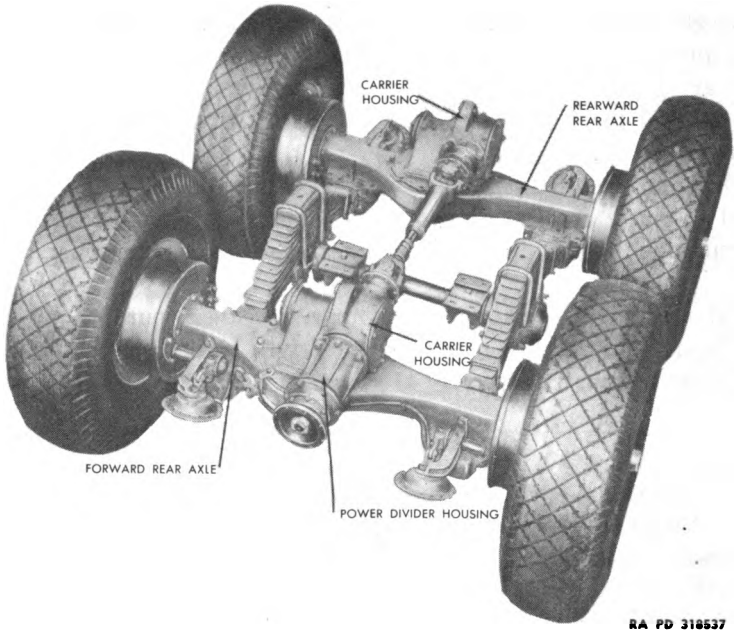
Tandem Dual Rear Axle Arrangement with Double Reduction Final Drives and Power Divider.
